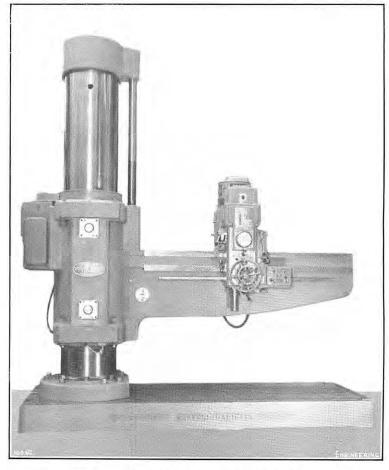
O.D.4 Radial Drilling Machine; William Asquith, Ltd.
